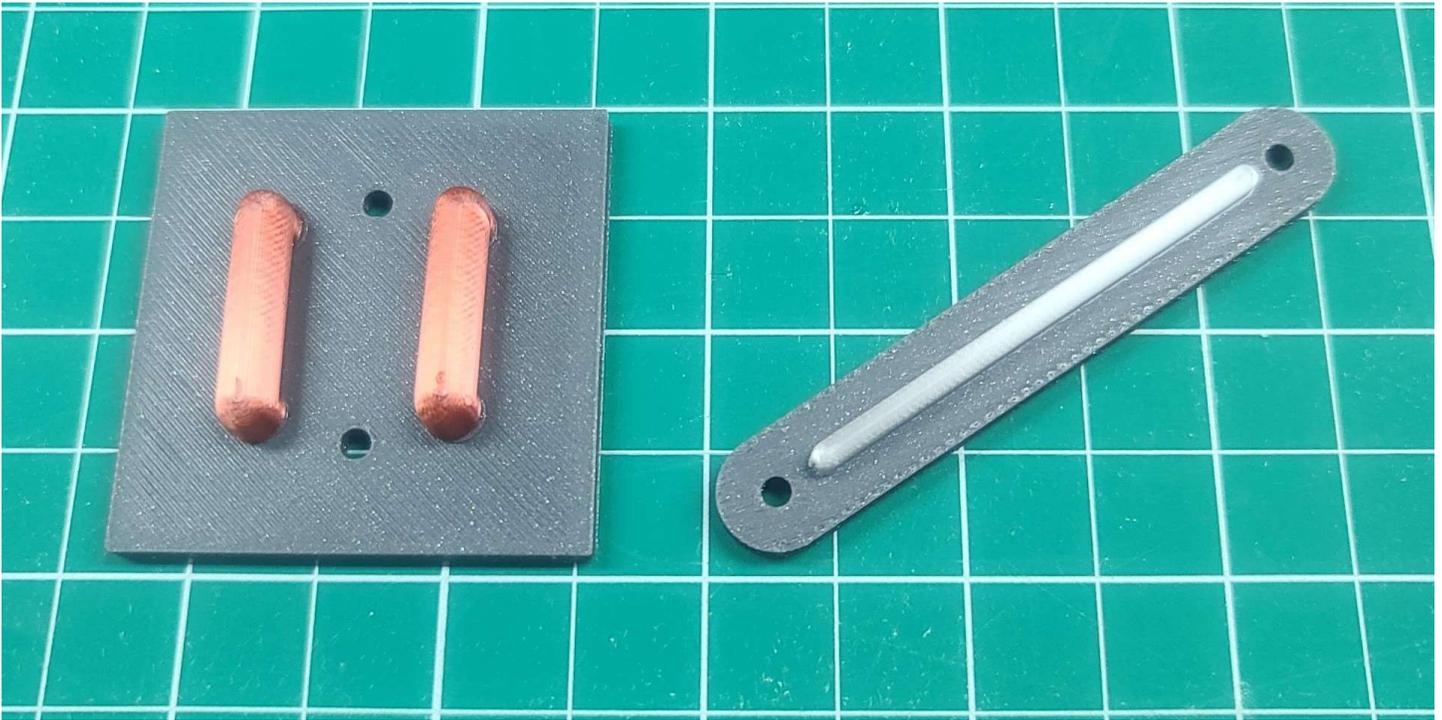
S4 Gear Holder & S1 Drawer Lid Two Color Printing Results
